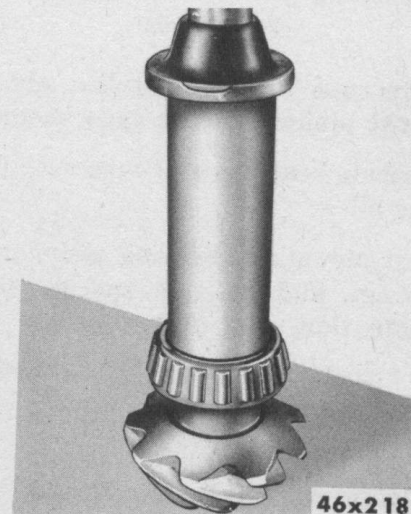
Installing Pinion Inner Bearing, Tools DD-955, DD-956 or DD-957
